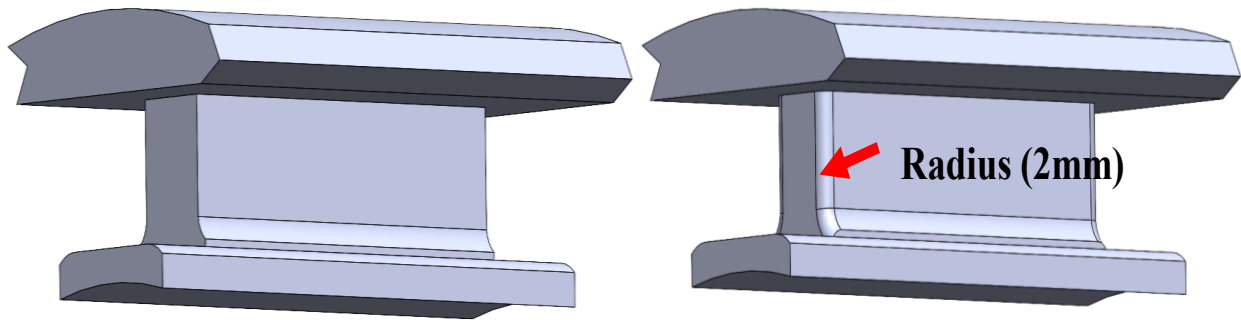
53. SMC tooth (a) Without fillet (b) With fillet radius (2mm)
